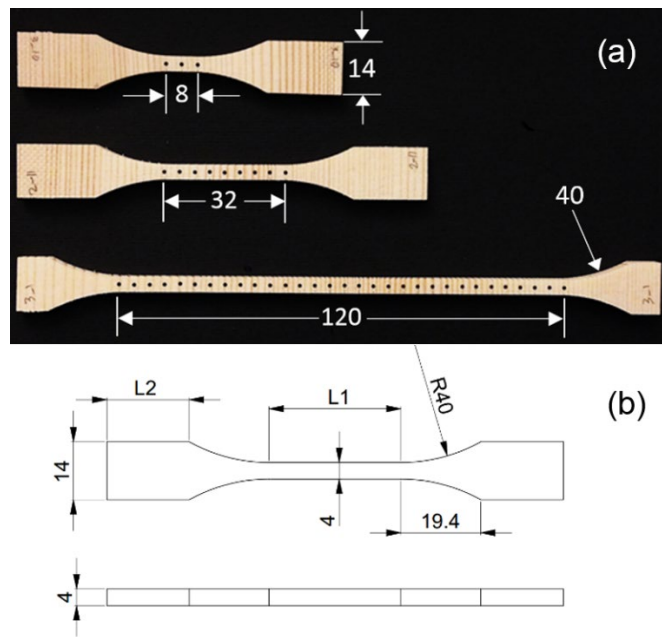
a) Fabricated specimens of different lengths. b) Designed geometry of specimens for transverse tensile tests. Dimensions are in mm.
